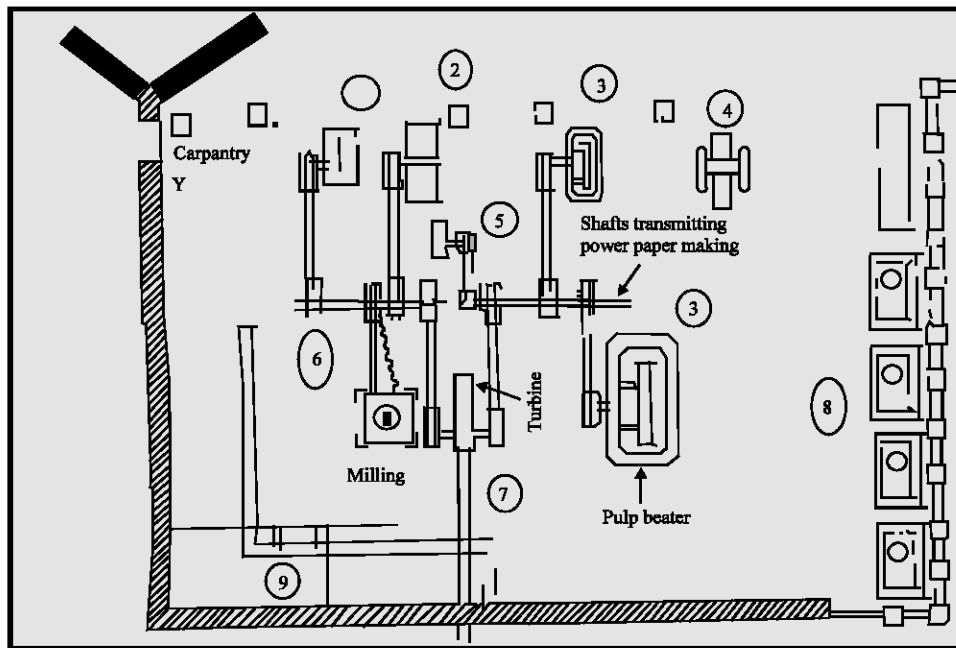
A small Kw Turbine that can be used to drive machinery in a rural setup
